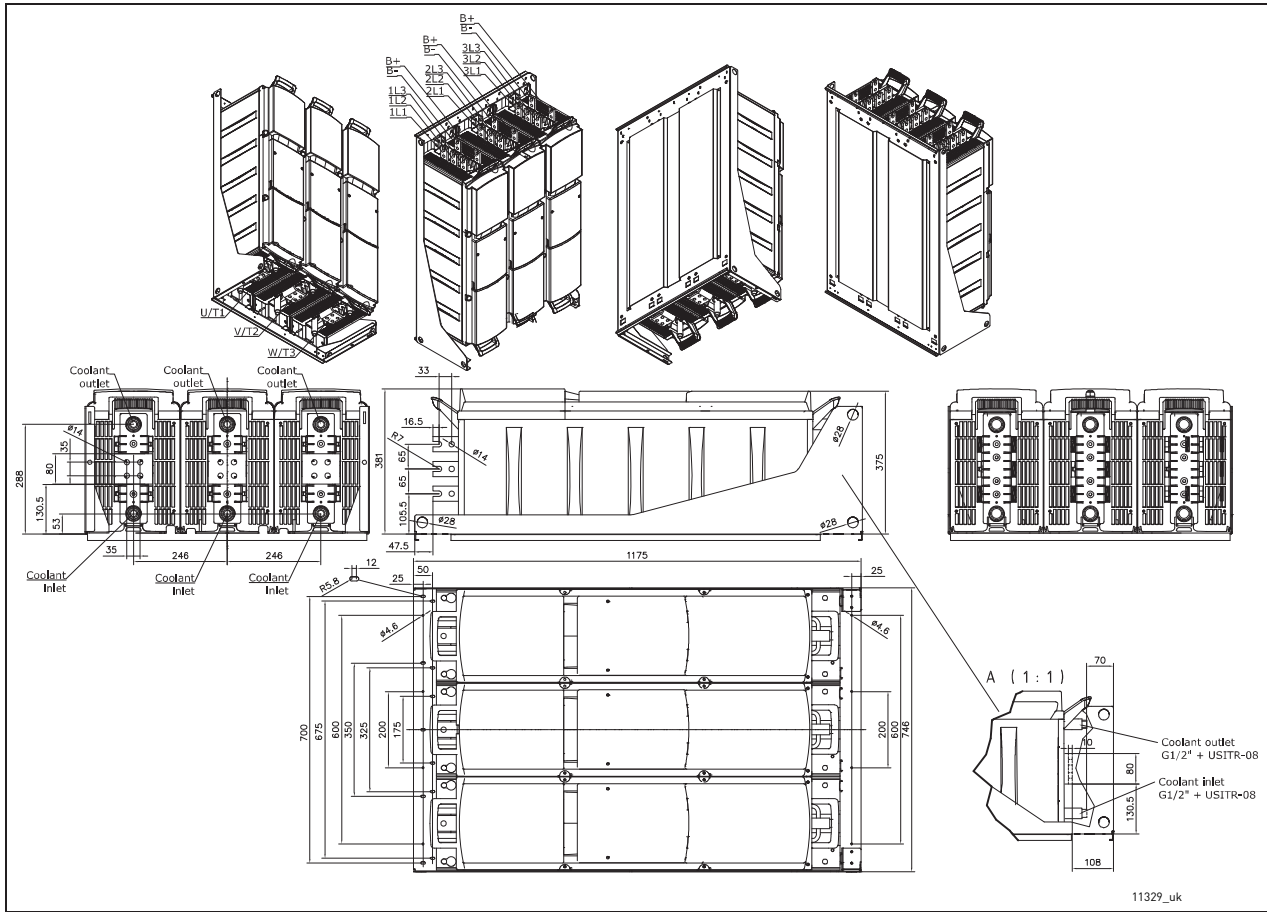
VACON[®] NX Liquid-cooled AC drive (6-pulse) dimensions, CH74, IP00 (UL open type)
